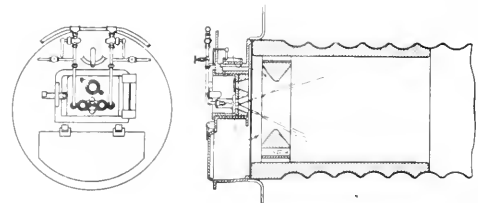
Furnace Arrangement on "Tebe" Using Mechanical Spray Burners.
